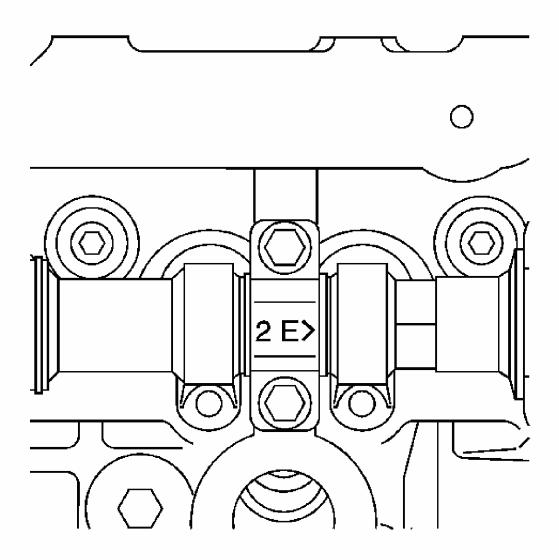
View Of Exhaust Camshaft Bearing Cap Markings Courtesy of GENERAL MOTORS CORP.
